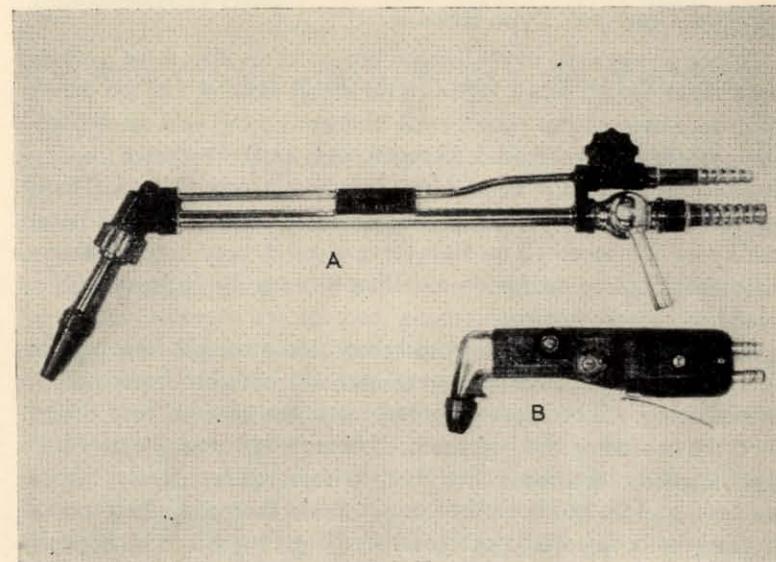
THE OXYGEN-COAL-GAS TYPE BURNER IS SHOWN AT "A" ABOVE, AND "B" SHOWS THE "FLAMEMASTER" TORCH
